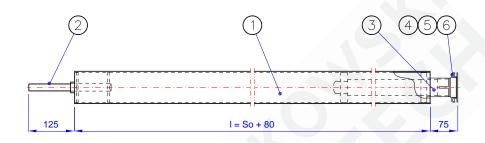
MARC-Ok120-01.02.00 [Winding shaft]
